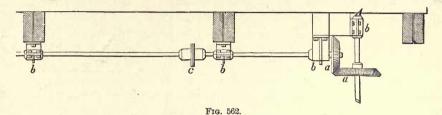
represents a line of shafting. A is an upright shaft; aa, bevelgears; bb, bearings for the shafts; c, coupling or connection of the several pieces of shafting. These shafts are of wrought-iron or steel, of uniform section. As the power is distributed from this line of shafting, the torsional strain diminishes with the distance from the bevel-gears or first movers, and the diameter of each piece of shafting may be reduced consecutively, if necessary; but uniformity will generally be found to be of more importance than a small saving of material. The drawing given is of a scale large enough to order shafting by, but the dimensions should be written in.
